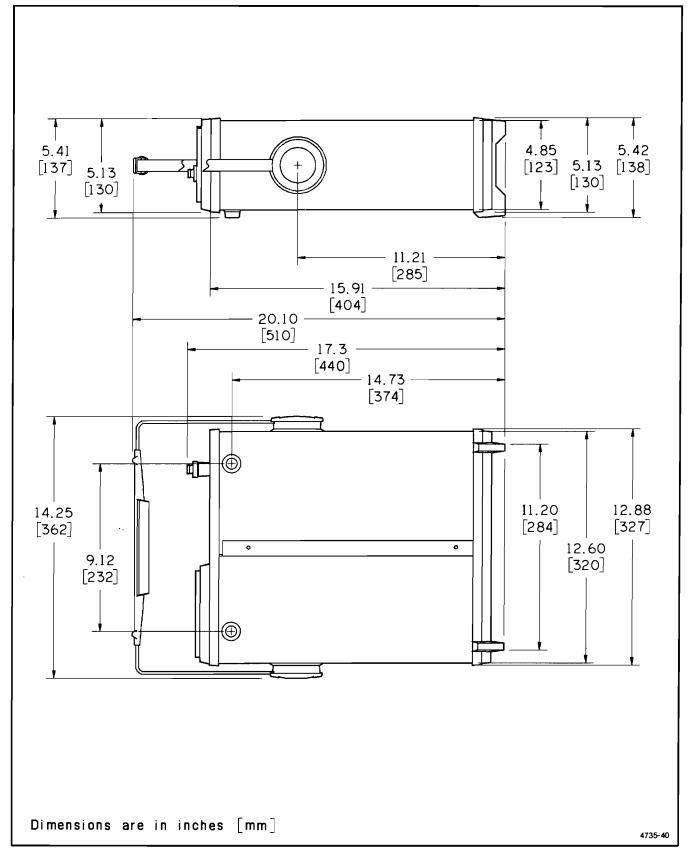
Physical dimensions of the 2235A Oscilloscope.
